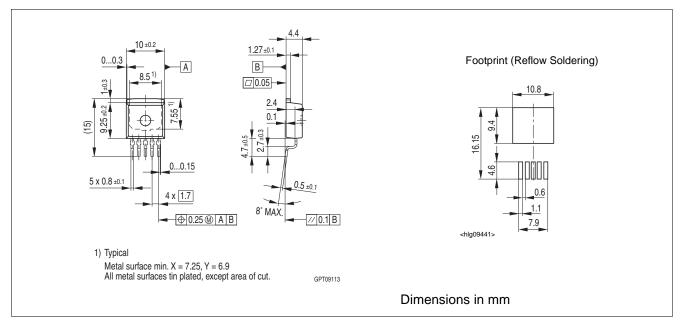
PG-TO263-5-1 Package Outline and Footprint
